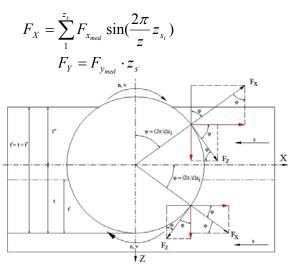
Cutting force's components in climb asymmetrical face milling.
